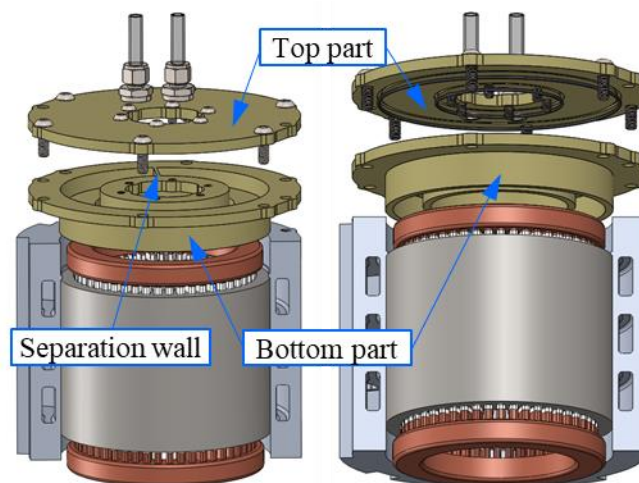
Final design of the end-winding channel. The bottom part with the U-shape cavity is pushed to the end-windings and the top part is fixed to the bottom part and the housing.
